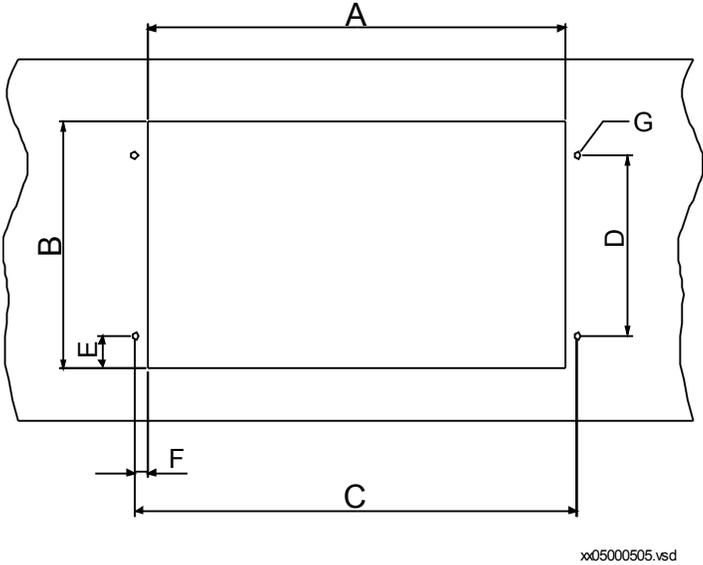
Panel-cut out dimensions for side-by-side flush mounting
